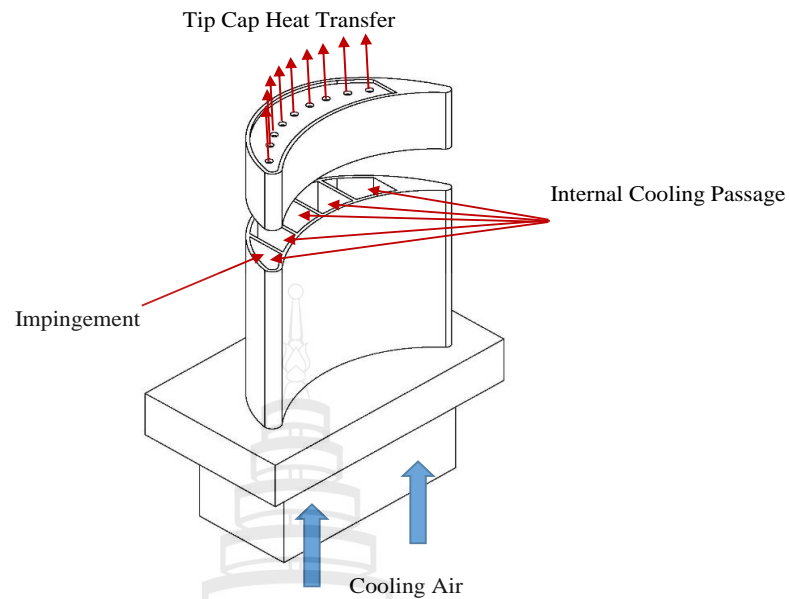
Three-dimensional view without rib designed of the cooling system in a gas turbine blade
